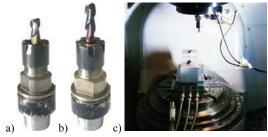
Screening tool (a) new tool (b) machine set-up (c).
